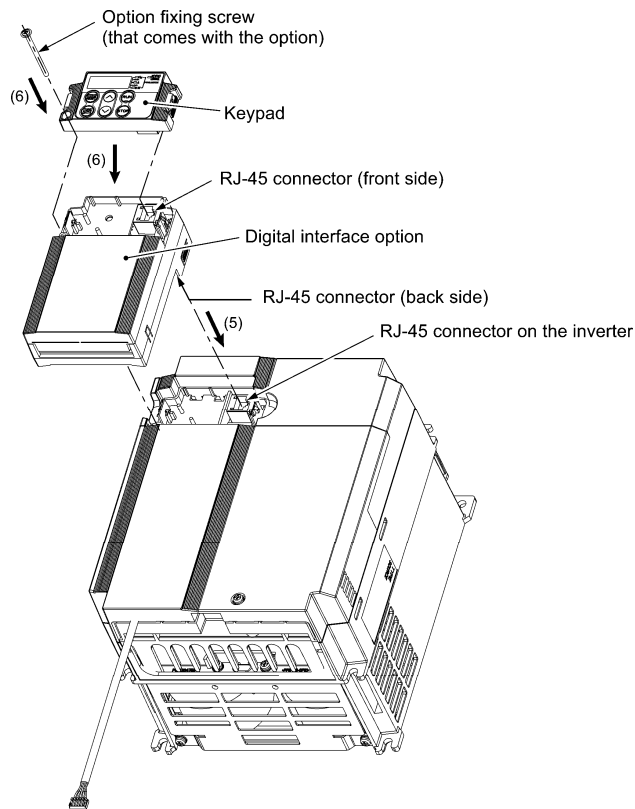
Mounting the Digital Interface Option and the Keypad
